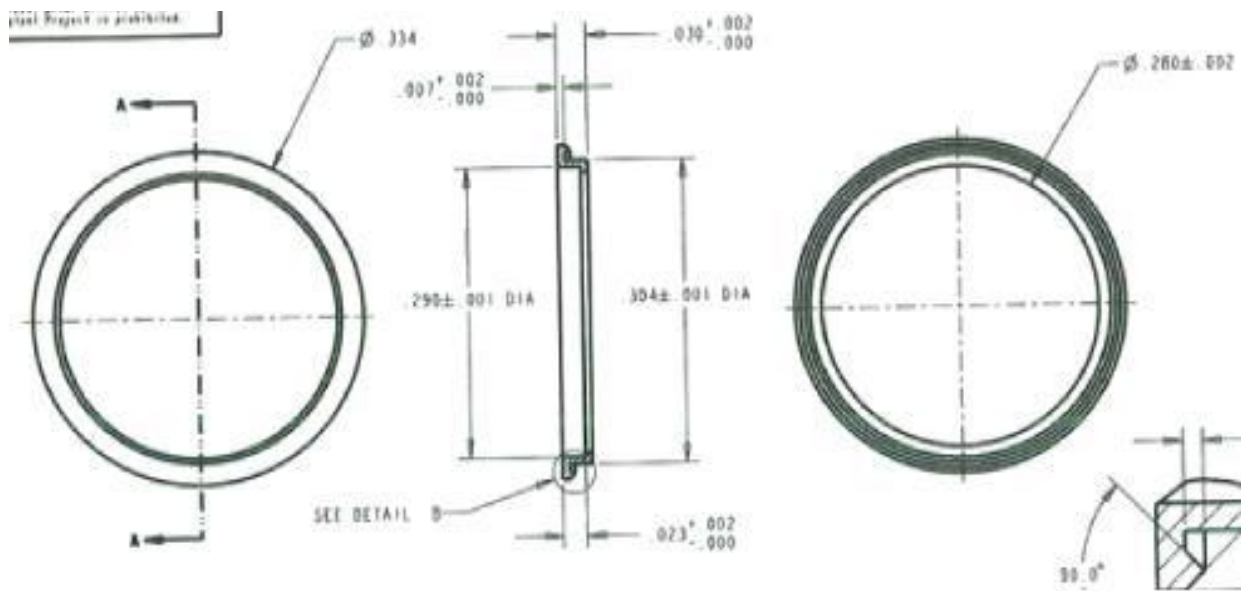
TOP VIEW, SECTION VIEW, BOTTOM VIEW OF TITANIUM ELEMENT [4]
